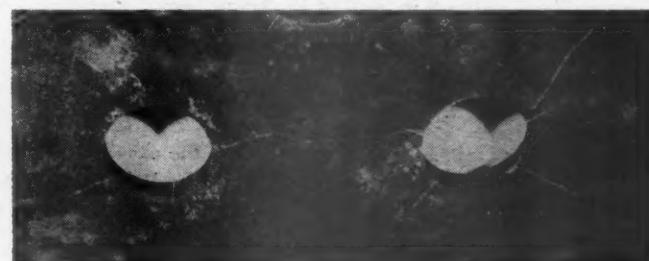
Cracking in countersunk rivet holes as a result of sharp corners at edge of holes and of tool marks
